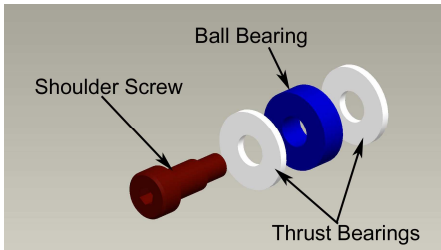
Exploded CAD model of shoulder screw assembly.
